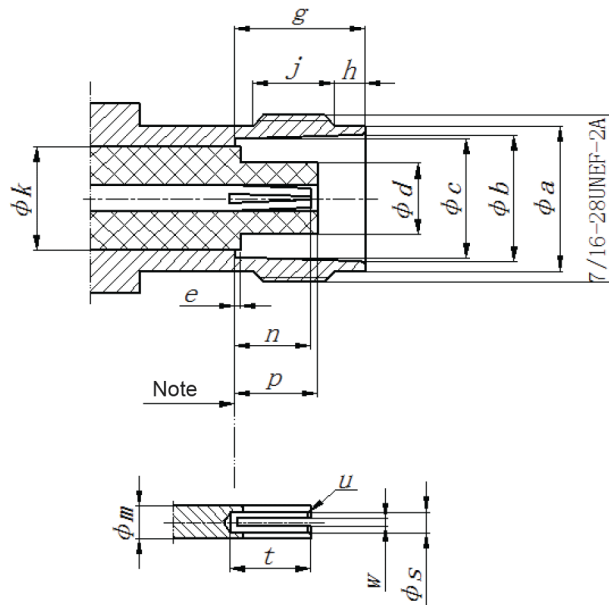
Connector with pin centre contact (for dimensions, see Table 1)
